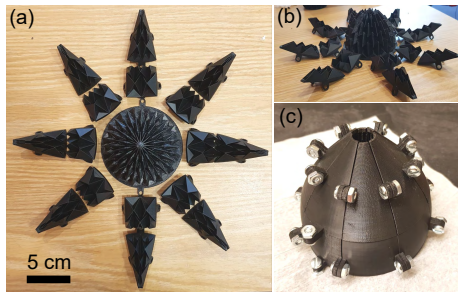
3D-printed molds for casting the “magic-ball” skeletons with silicone rubbers
